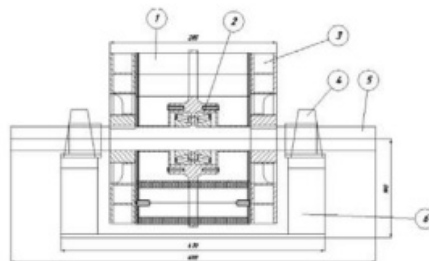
The main parts of dynamometer: (1) solenoid; (2) stator; (3) rotor; (4) pillow block bearing; (5) shaft; (6) frame [4]
